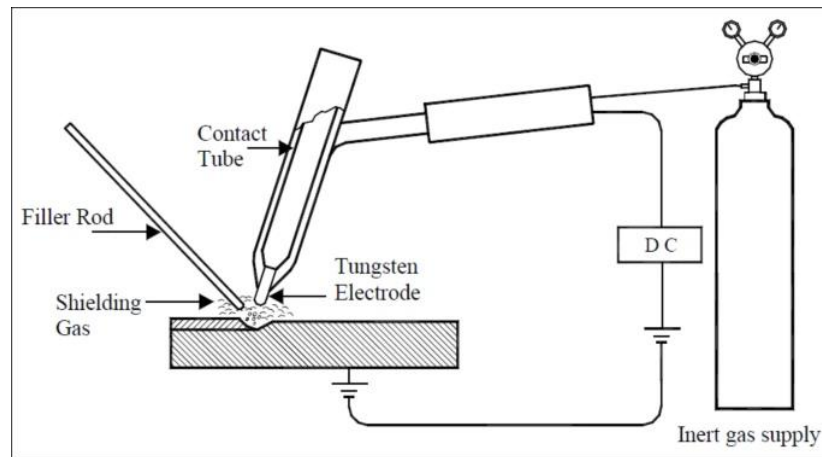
Schematic diagram of a TIG welding process [9].
